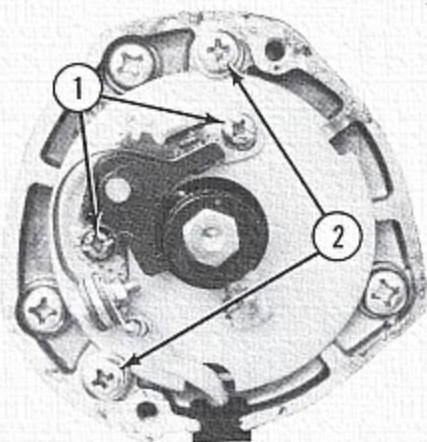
Contact Point Assembly — Honda Single Cylinder Engine With Adjustable Base Plate
